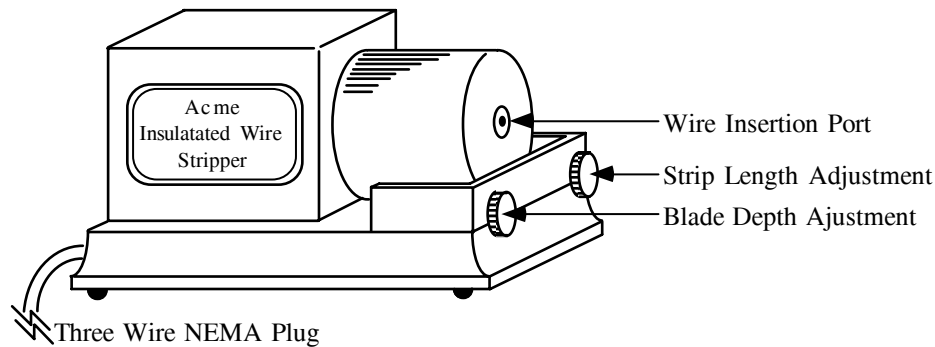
Typical, Mechanical Wire Stripper.
